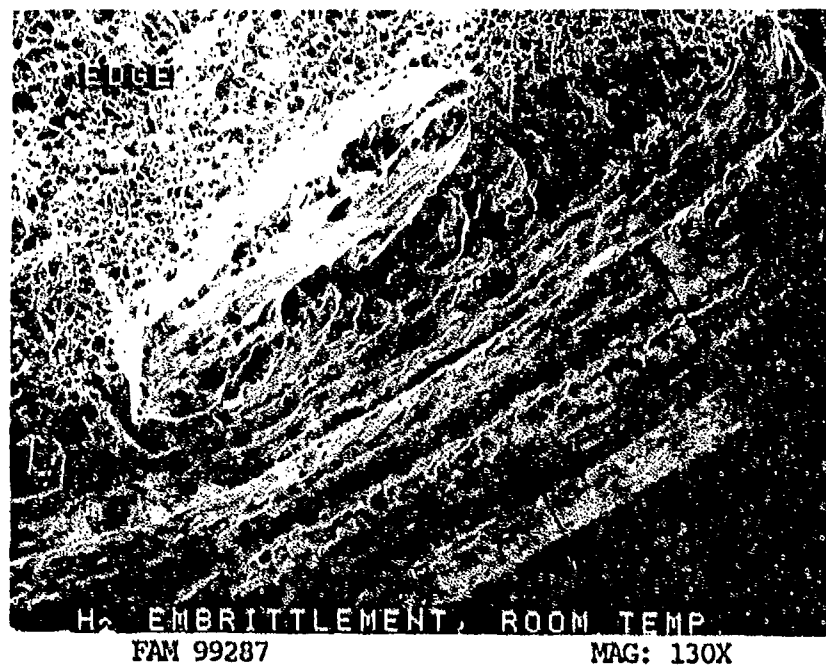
Secondary cracking in the notch adjacent to the primary fracture surface (arrows).
